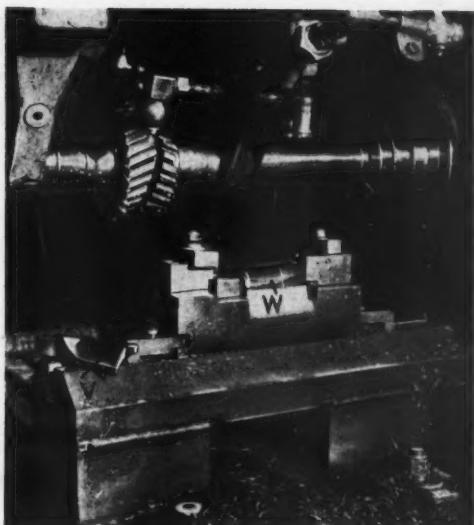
Close-up view of the working area of the Heller machine shown in Fig. 4. The Brayshaw cutter has two banks of teeth of opposite hand, separated by a staggered relief
